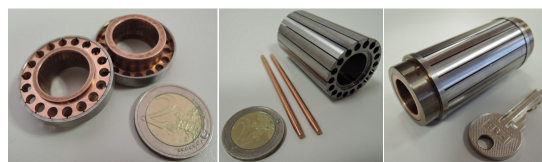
The rotor elements for shrink fit assembly and completed rotor.
